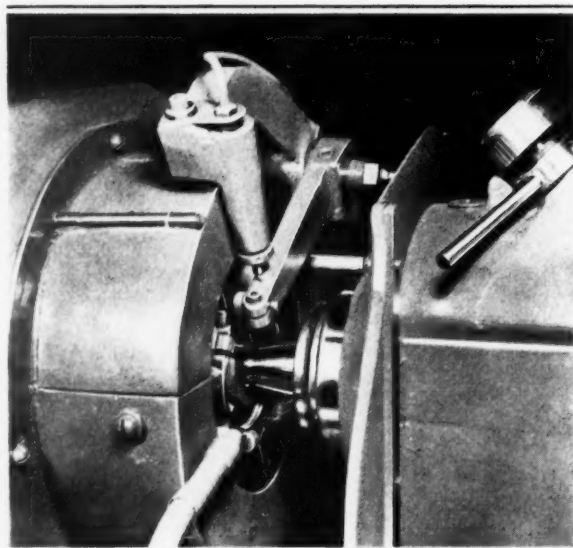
Typical Internal Grinding Set-up on the Machine Shown in Fig. 1
